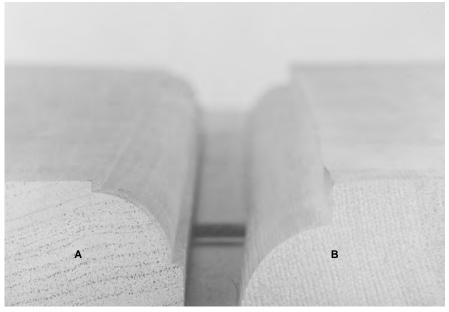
Notice that workpiece (A) has only a portion of its edge removed, while workpiece (B) has the entire edge removed.
